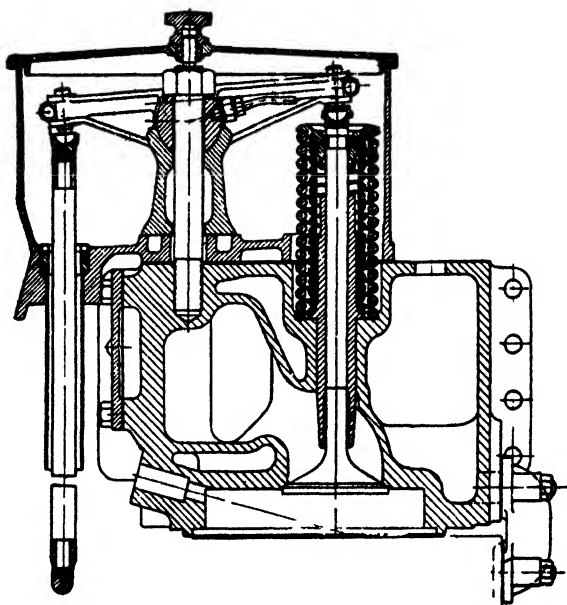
Cylinder head and valve gear of Ingersoll-Rand Diesel.
